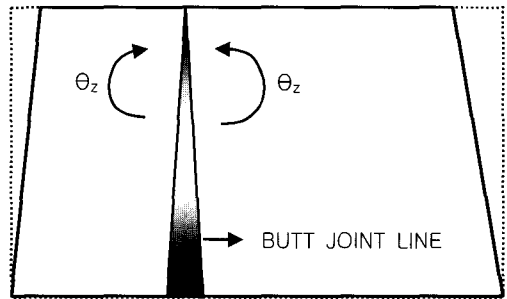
Inplane rotational deformation due to butt weld
